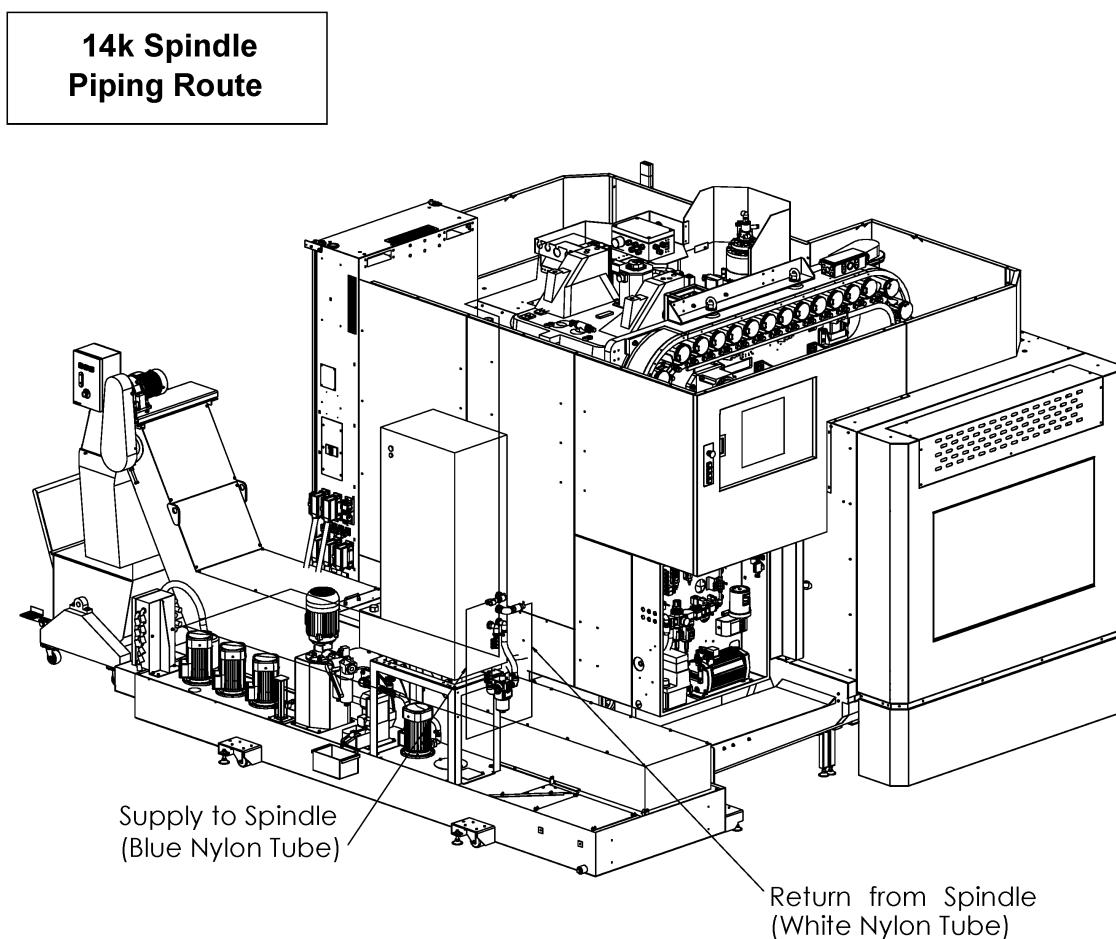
14k Spindle Piping Route from Oilmatic to Spindle
